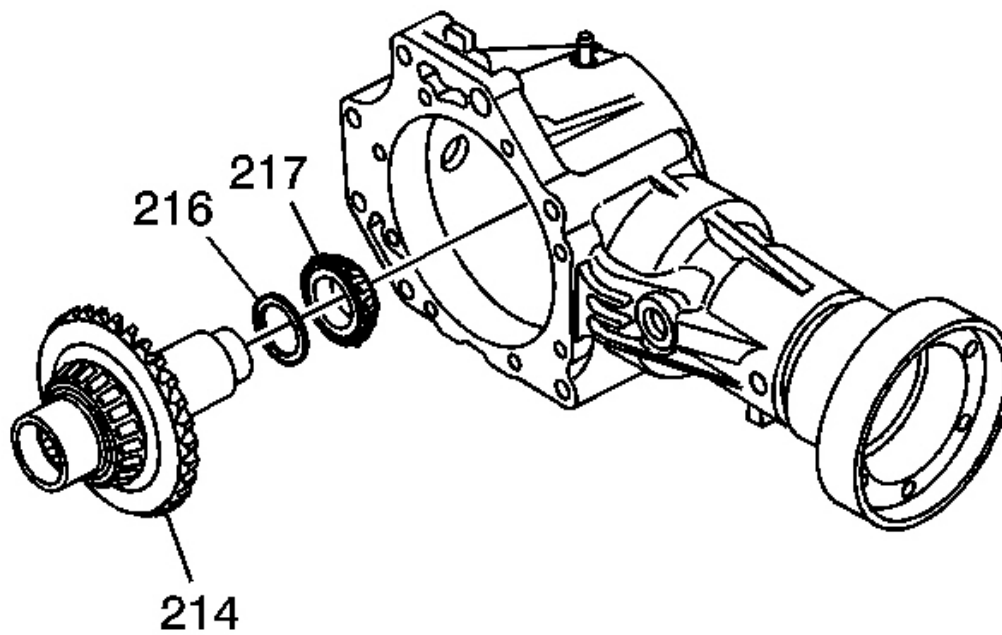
Removing/Installing Input Gear, Bearing & 25 mm Shim
